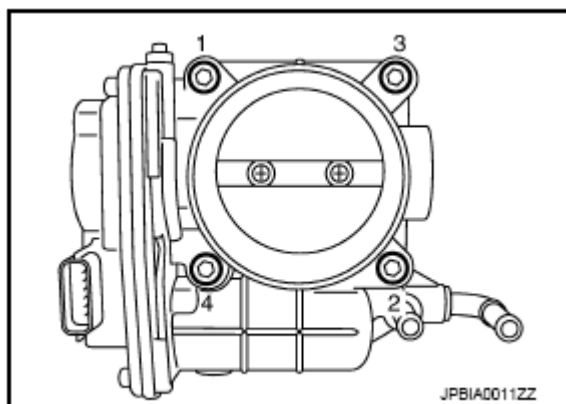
Locating Electric Throttle Control Actuator Mounting Bolts With Tightening Sequence
